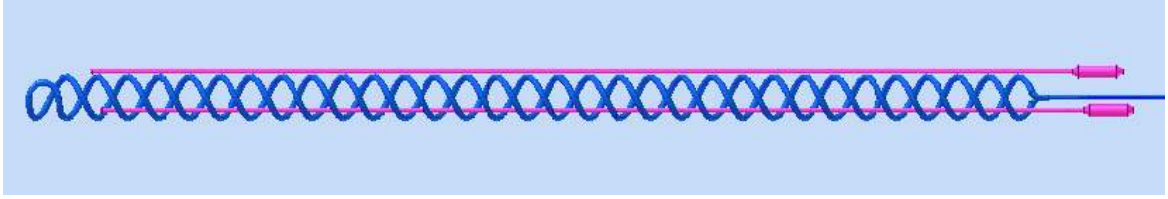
CAD Drawing of Heat Exchanger and Thermocouple Probes
